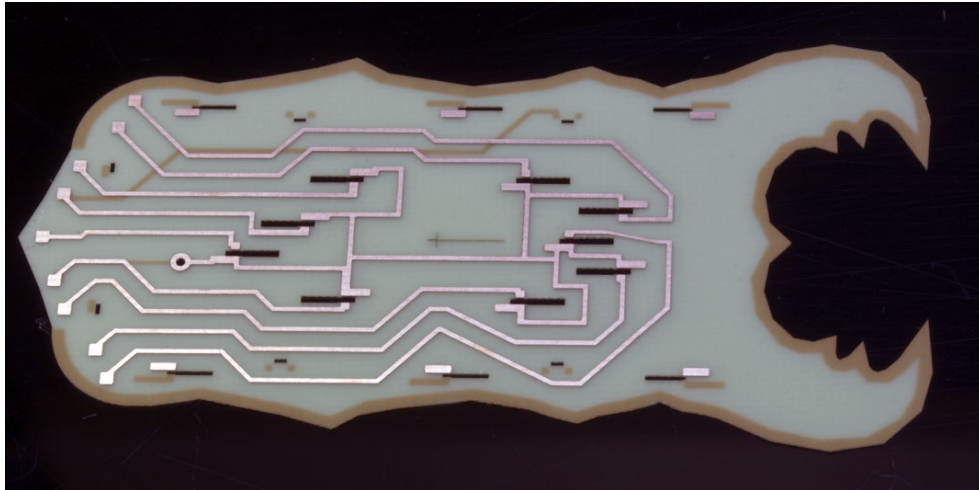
Single or double-sided circuit boards are fabricated with a custom in-house manufacturing process. The HAMR4 double-sided insect-inspired body is shown here.
